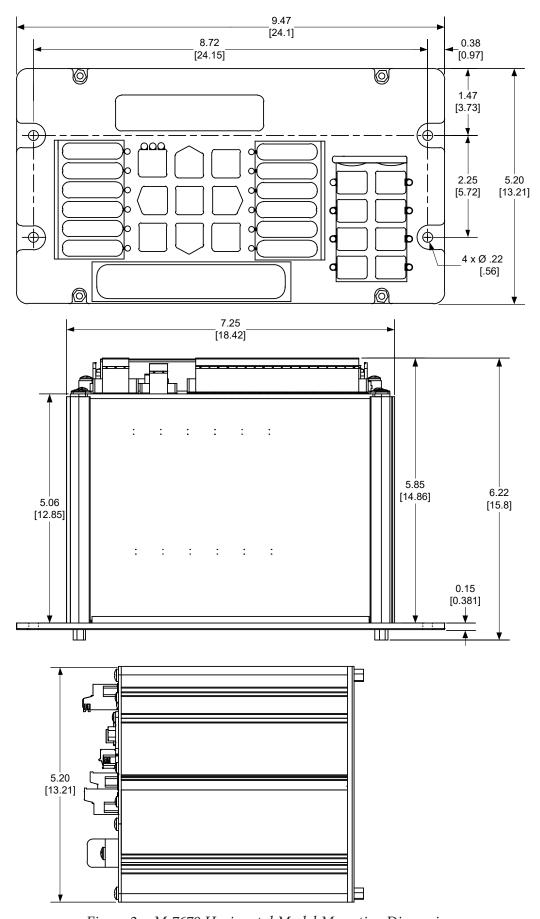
M-7679 Horizontal Model Mounting Dimensions
